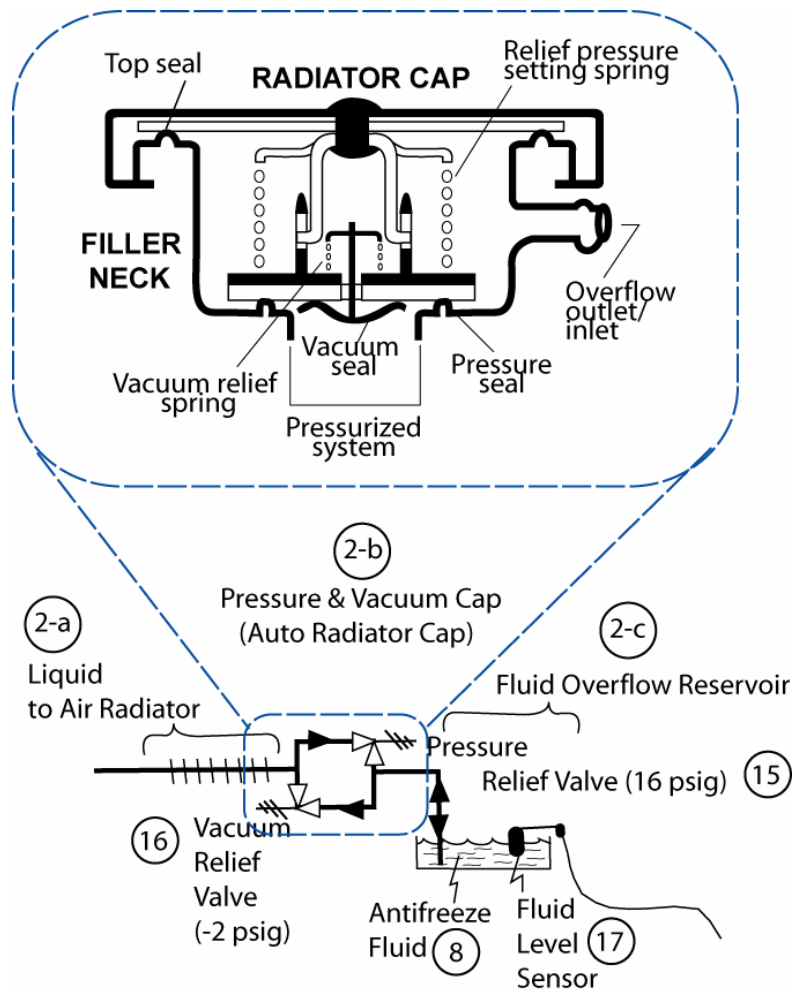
Parallel Pressure & Vacuum Relief Valves Inside the Radiator Cap
